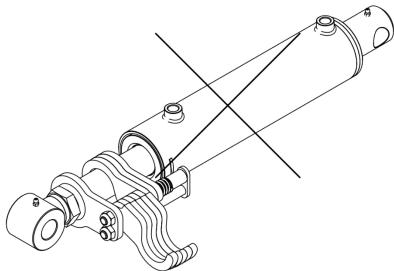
Latches fitted incorrectly on the cylinder piston rod. If the latches are partially omitted from the cylinder, the forces acting on the piston rod are not evenly distributed and may cause the piston rod to buckle, resulting in damage to the entire piston assembly. This type of adjustment is <u>unacceptable!</u>
